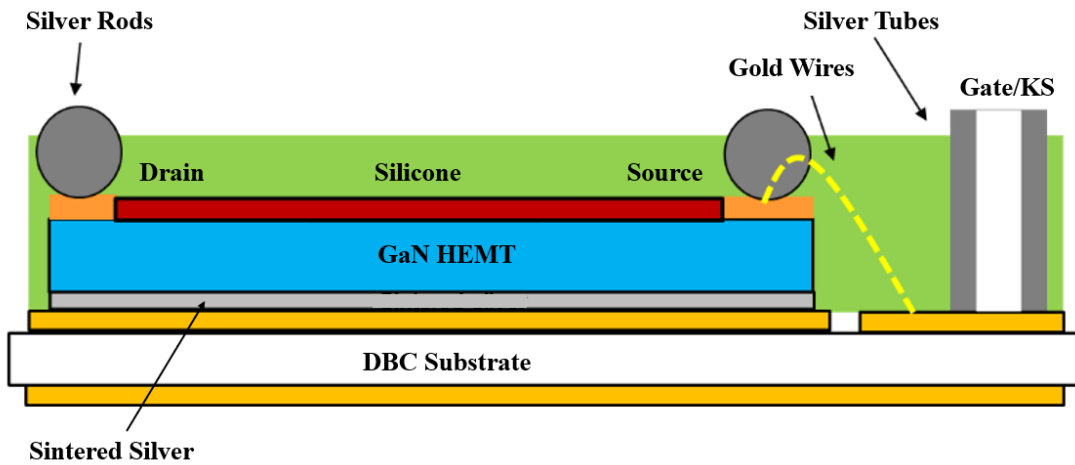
Cross-sectional view of the surface mount GaN HEMT package with silver rod interposers in Fig. A-3.
